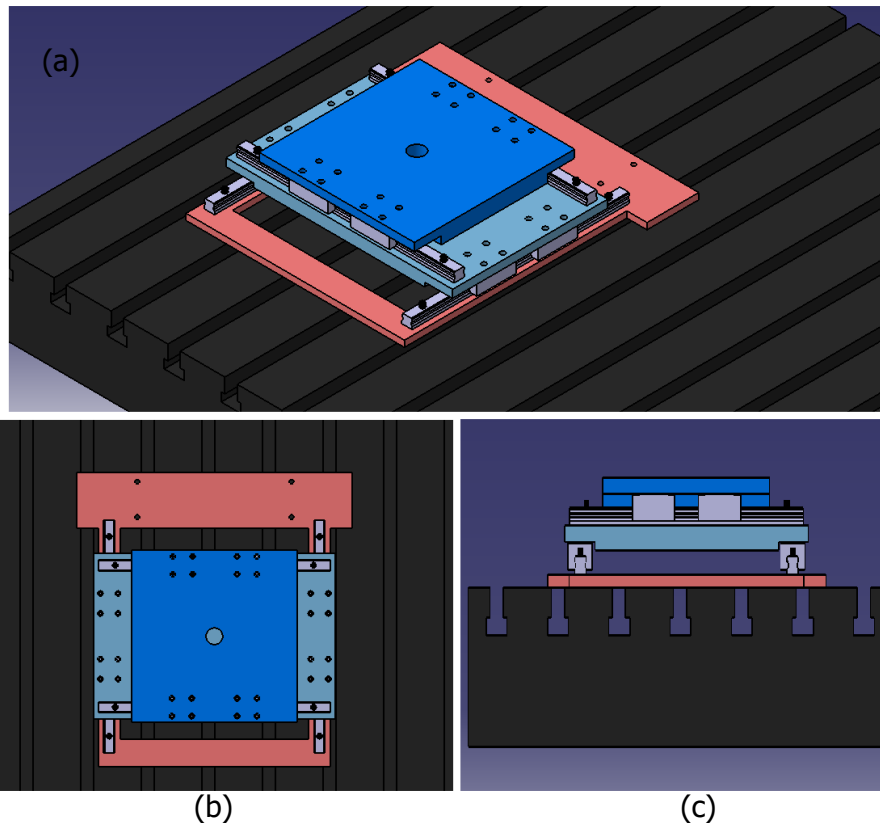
Sliding mechanism design in Catia V5 (a) isometric view; (b) top view; (c) side view
